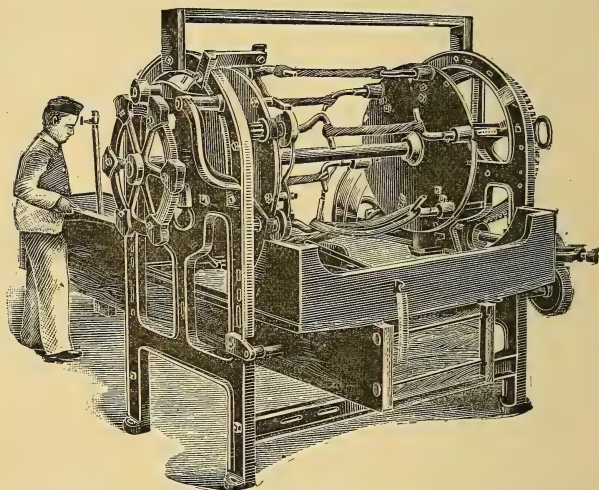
IMPROVED DISC HANK-SIZEING AND WRINGING MACHINE.
